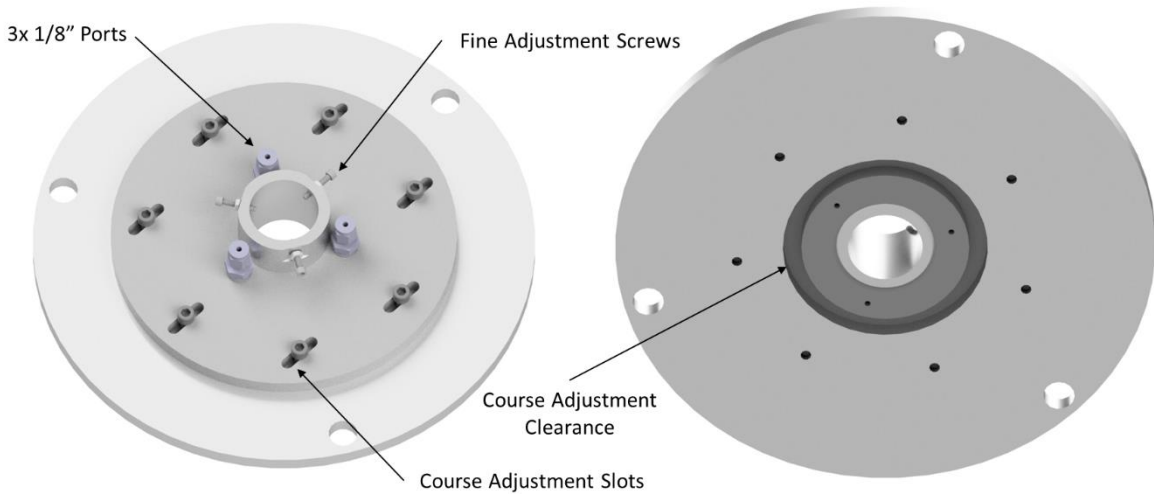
Isometric view of Support Structure with Full Scaled Test Section installed with labeled components considered in the tolerance stacking analysis.
